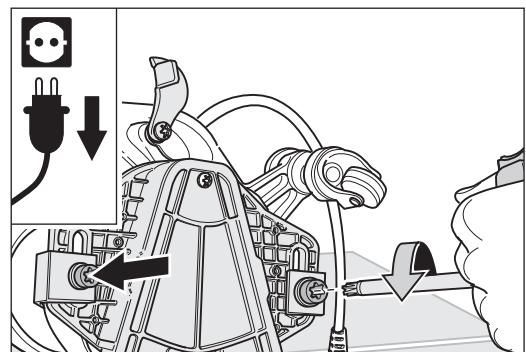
Remove the two screws which connect the attachment, along with the washers and the guide angles.
